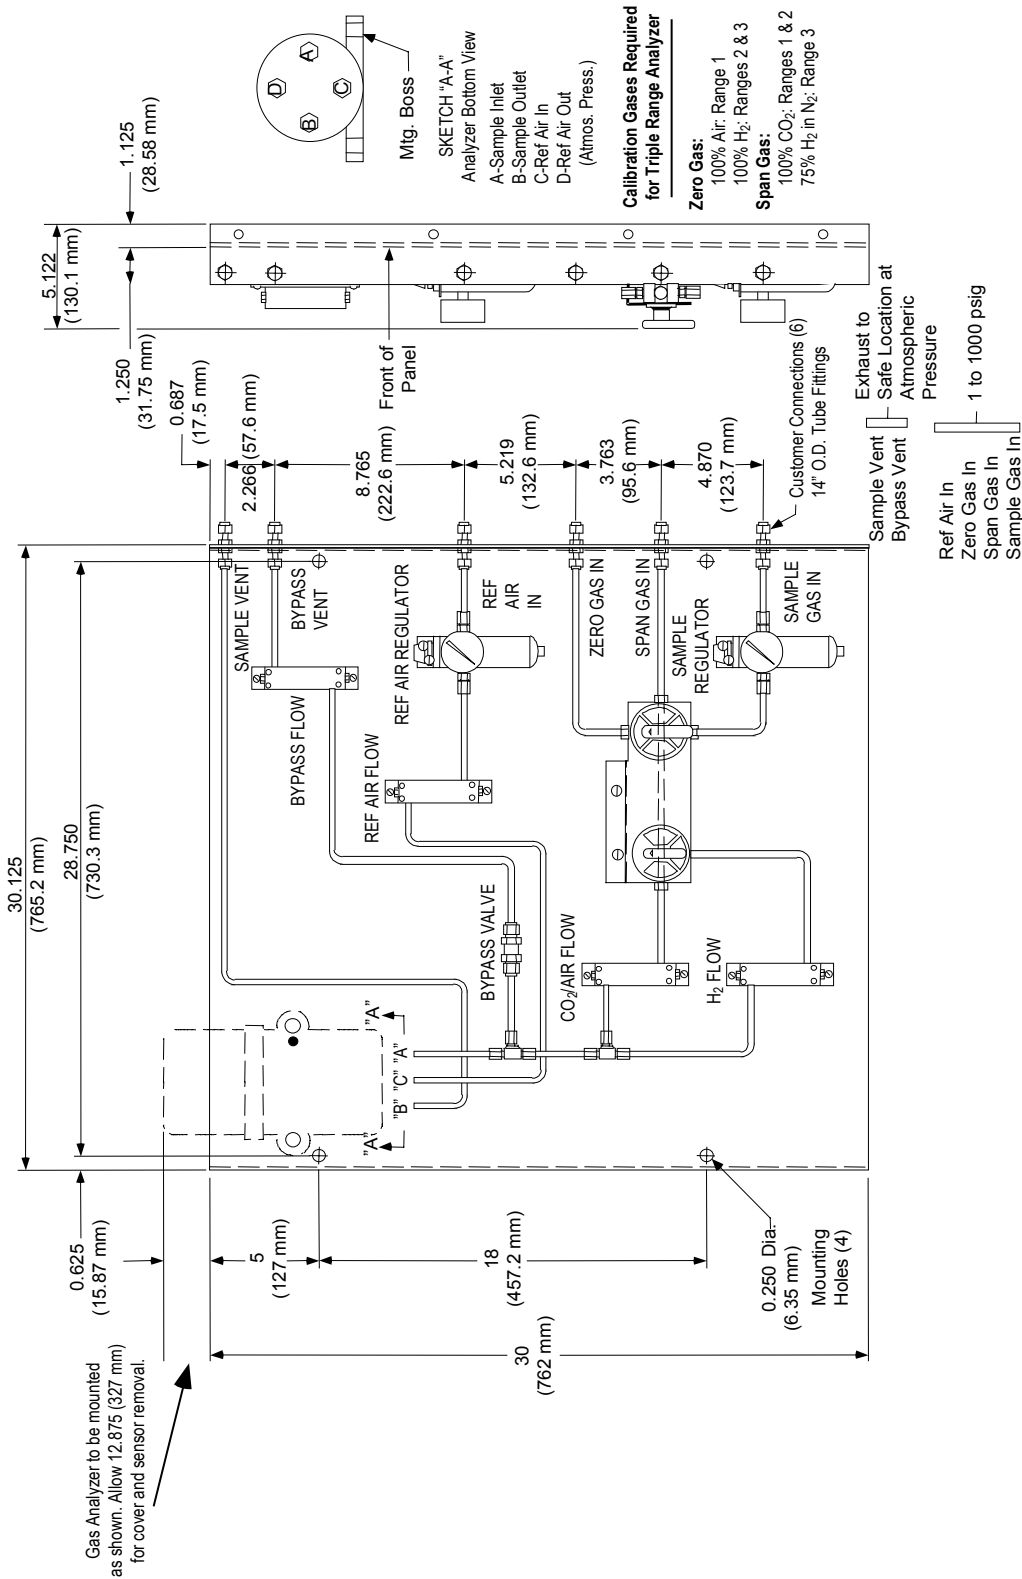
7872 Gas Sampling Panel Mounting Dimensions
